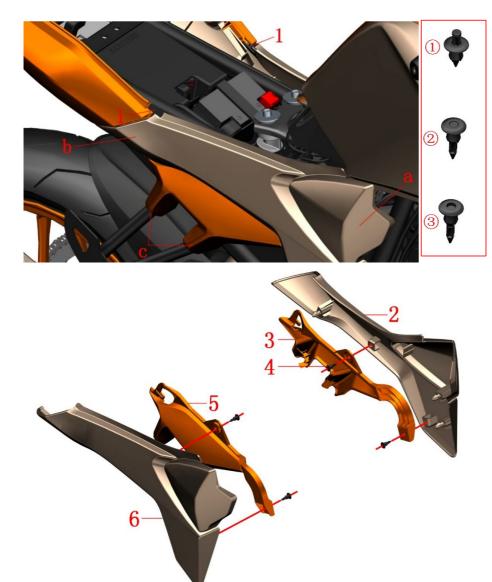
S	IDE COVER	Side cover assembly	CHK	40)
